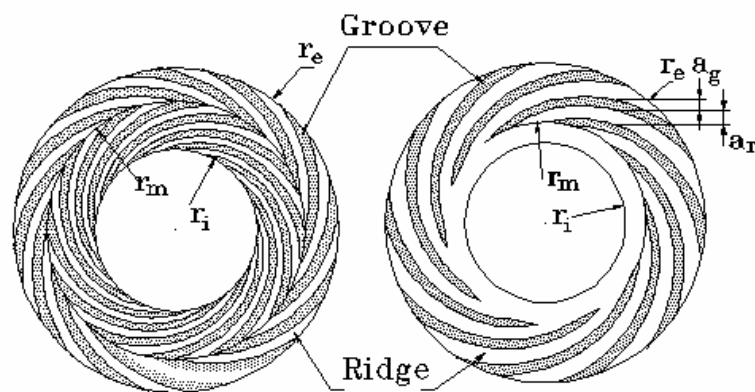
Schematic of herringbone and spiral grooved thrust bearings.
